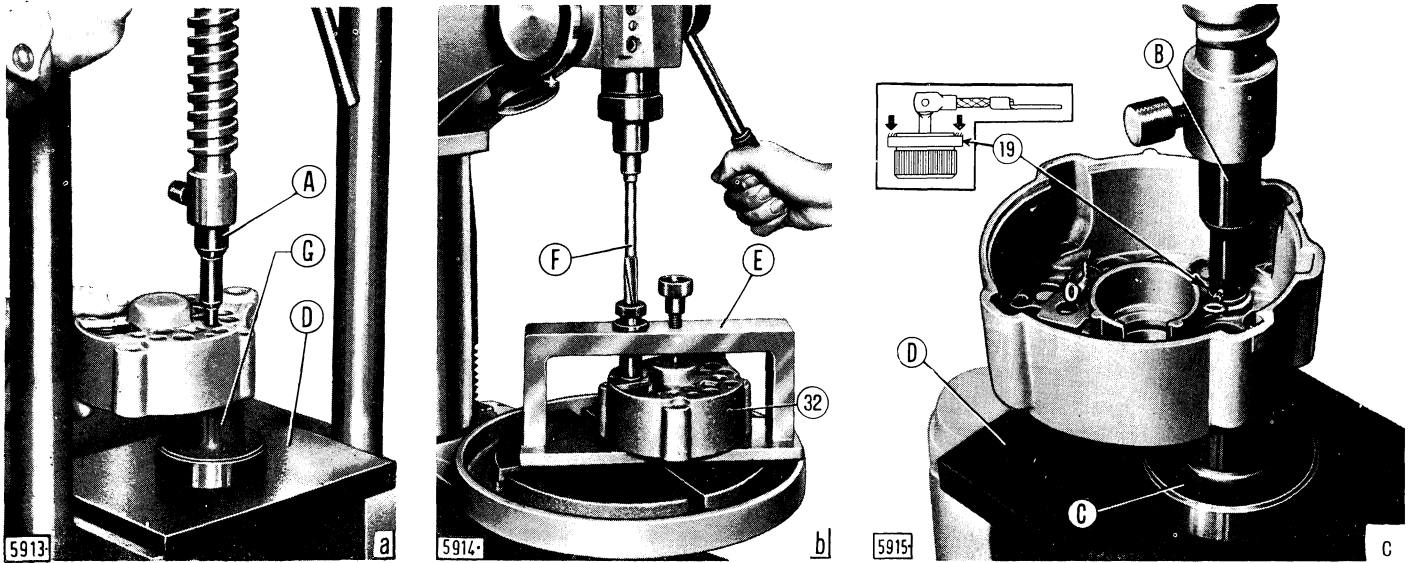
Removing Negative Diodes, Reaming Diode Seats and Reinstalling the Diodes by means of Hand Press Part No. 290021 and Fixed Drilling Machine (Speed = 1,000 r.p.m. approx.)
